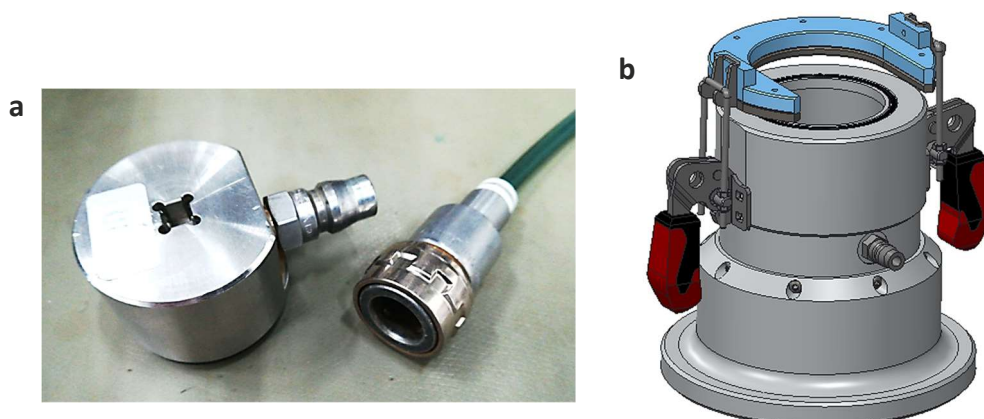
a) Fast air plug; b) New fixture to test leak.
